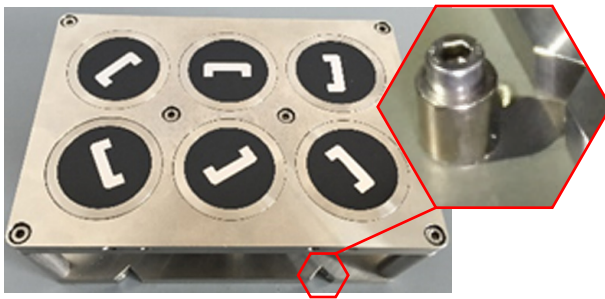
shows a 6-sample holder clamping fixture for multiple sample testing
